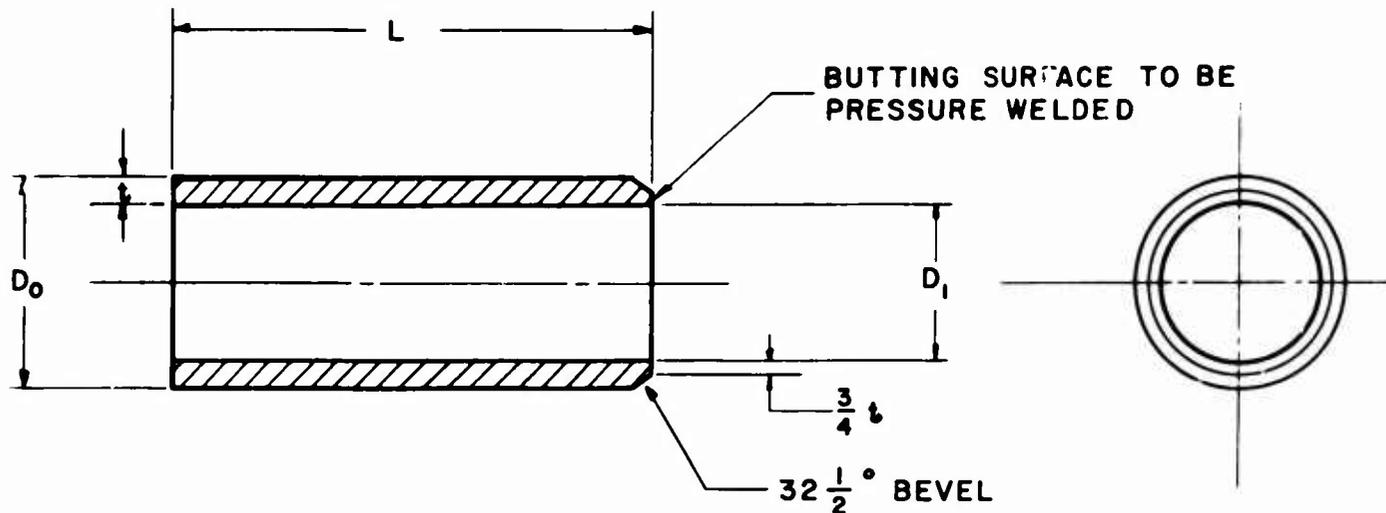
CYLINDER SECTION PRIOR TO PRESSURE WELDING
